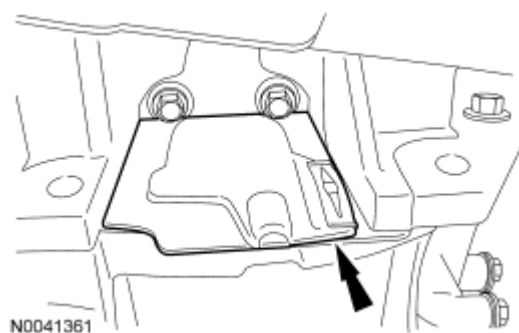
Locating Transaxle Insulator Bracket Nuts And Bolt
